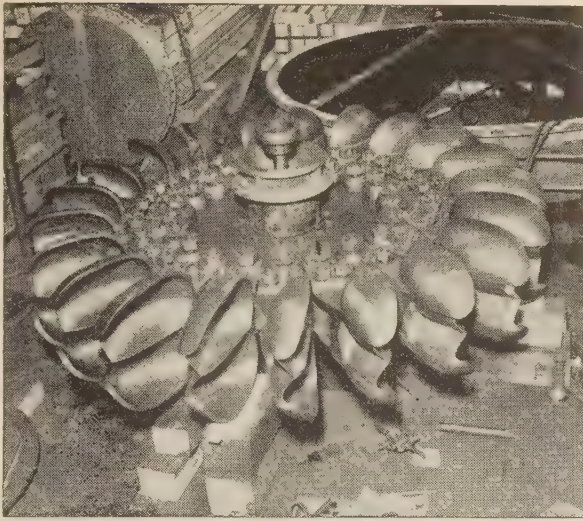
SHOP-ASSEMBLED DISK AND BUCKETS FOR 10-IN-DIAM JETS
